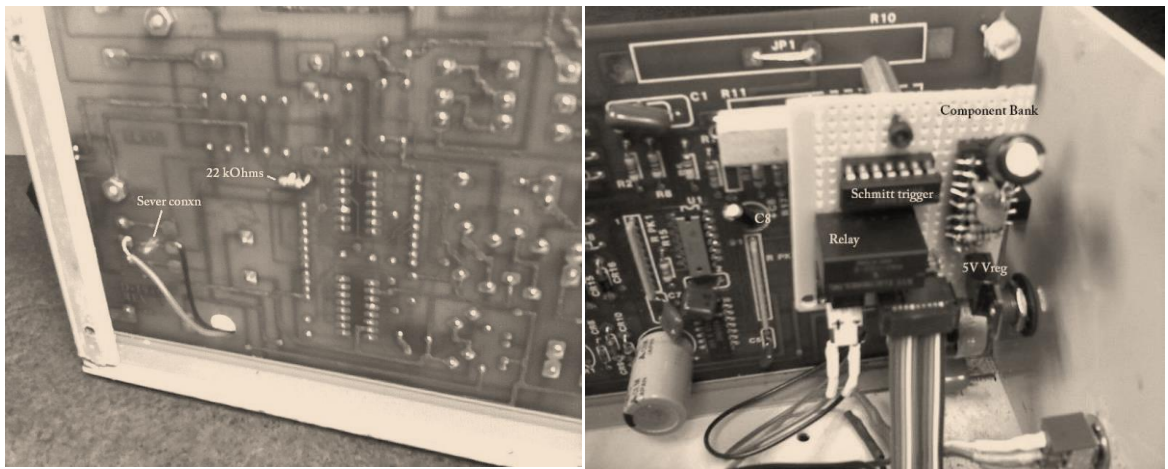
| Modifications made to the pump control circuit. Left: the circuit is cut for insertion of the switch. Right: custom switching circuit is mounted to the PCB.
